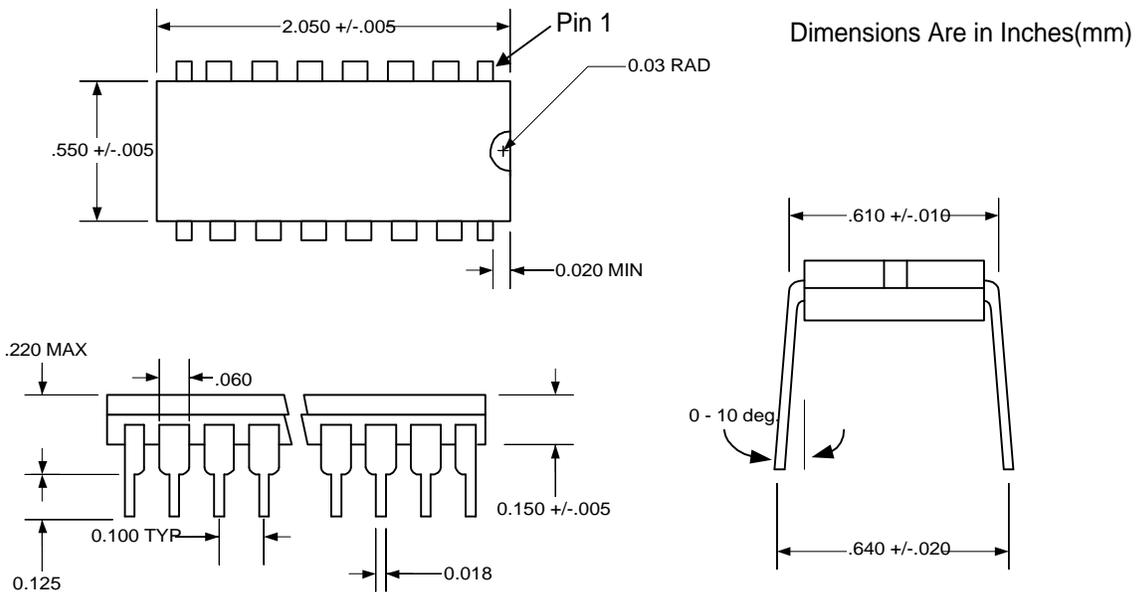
DEI1016C 40 Pin Plastic DIP Package Dimensions
